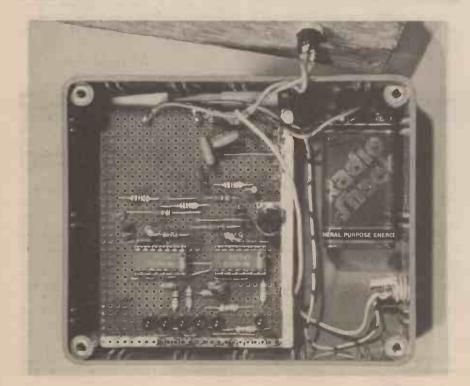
The stripboard and component layout of the Storage Heater Setting Indicator.
